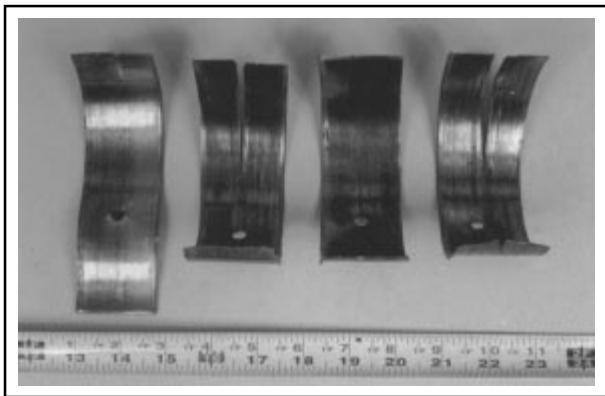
Connecting rod bearings from Crank #1, pin #2
